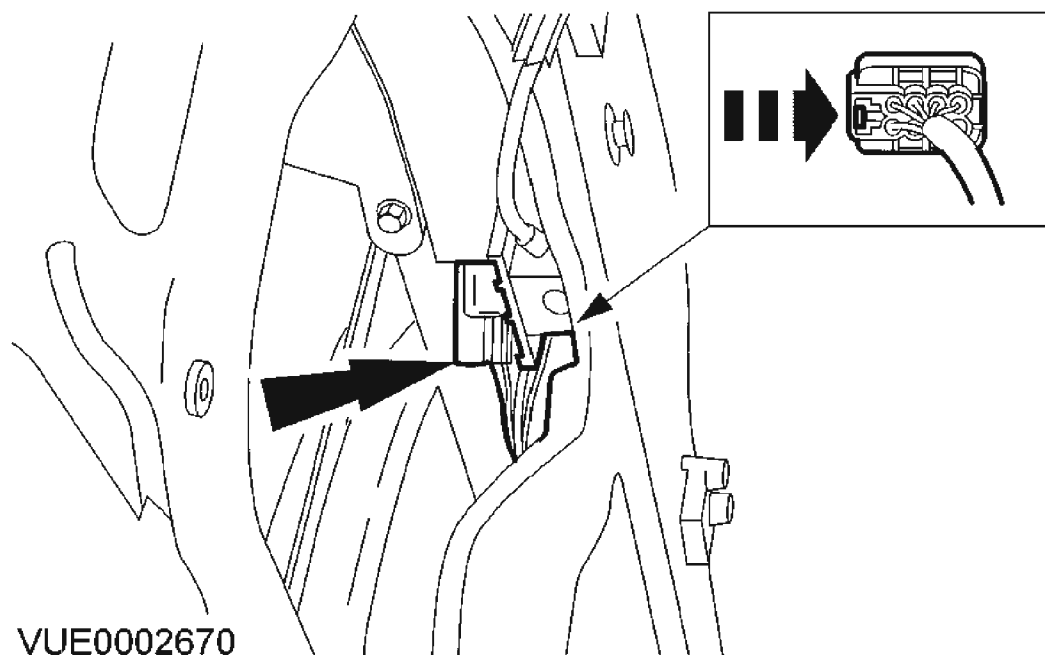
Disconnecting Door Latch Actuator Electrical Connector
